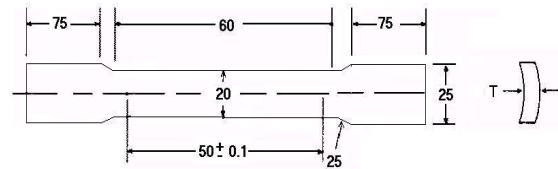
Tensile test specimen and dimensions (all dimensions are in mm)
